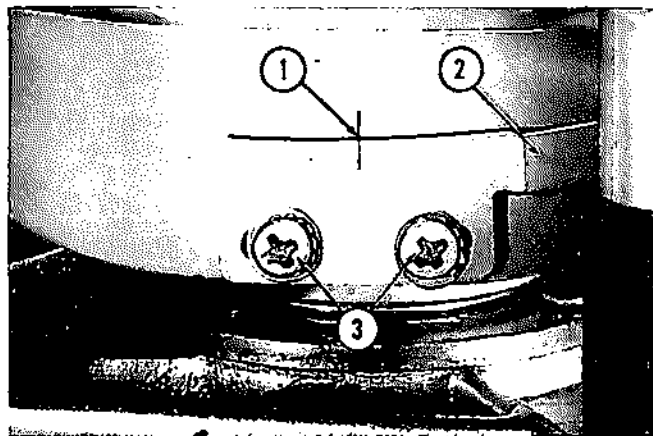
MUTE AND PLAY SWITCH ADJUSTMENT
